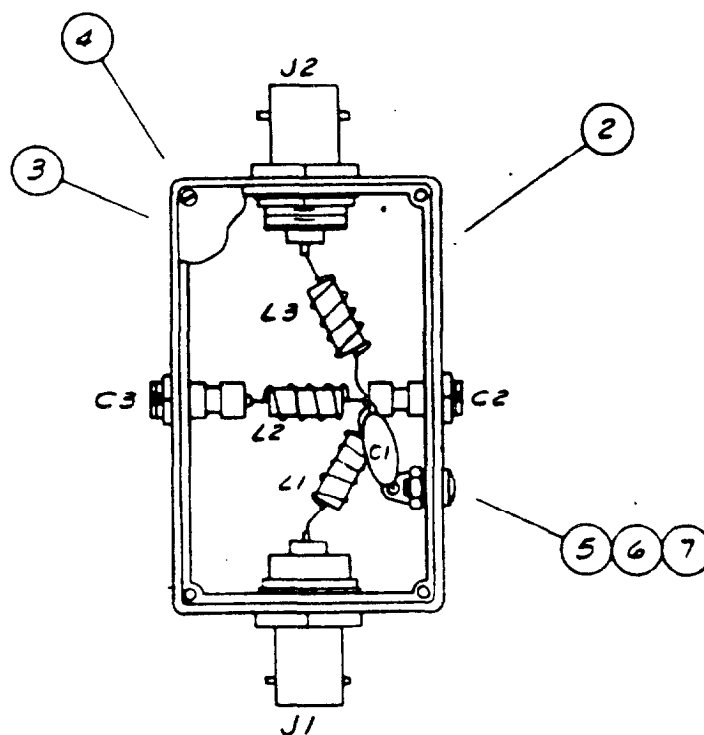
Harmonic Filter Assembly 3A5, Component Locations
